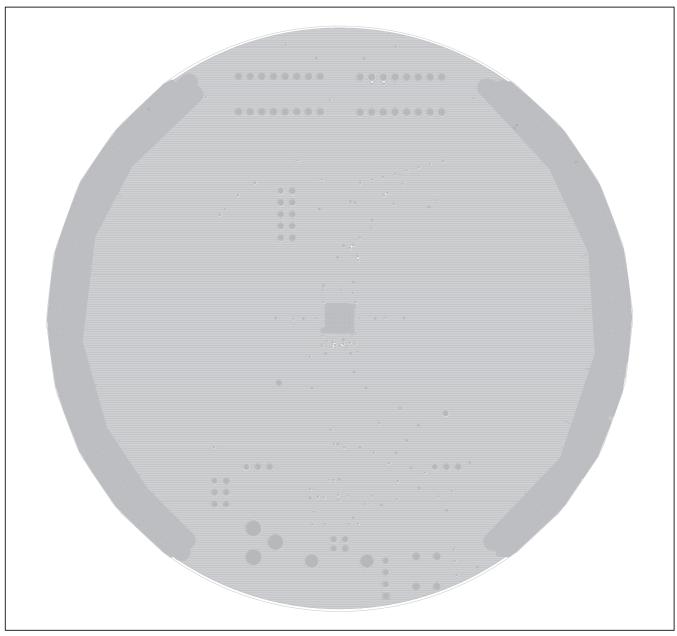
MAX3987 EV Kit PCB Layout—Ground Plane (Sheet 2 of 4)
